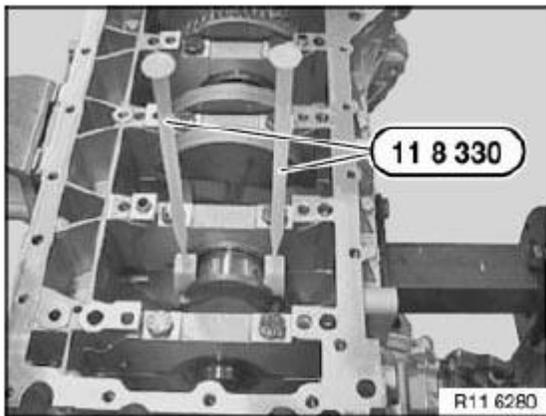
Identifying Special Tool (11 8 330) Attached To Connecting Rod
